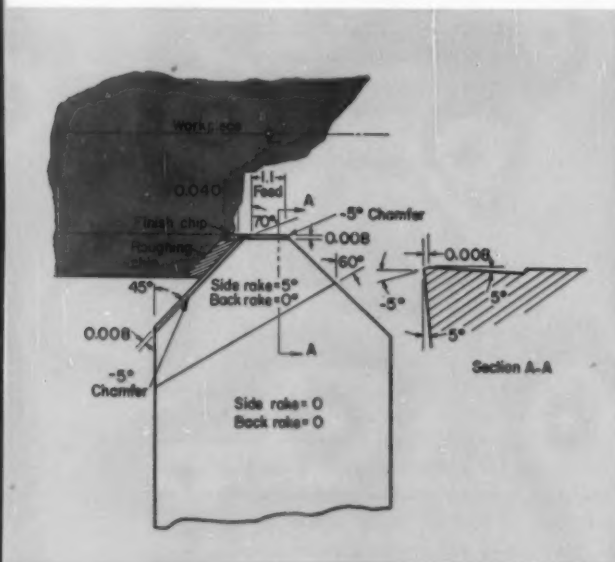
Plan view of Kolesov turning tool in position against a workpiece.
